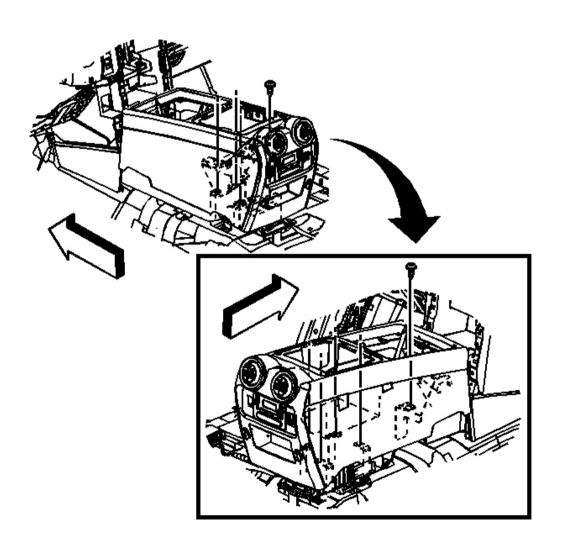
Removing & Installing Console Courtesy of GENERAL MOTORS CORP.
